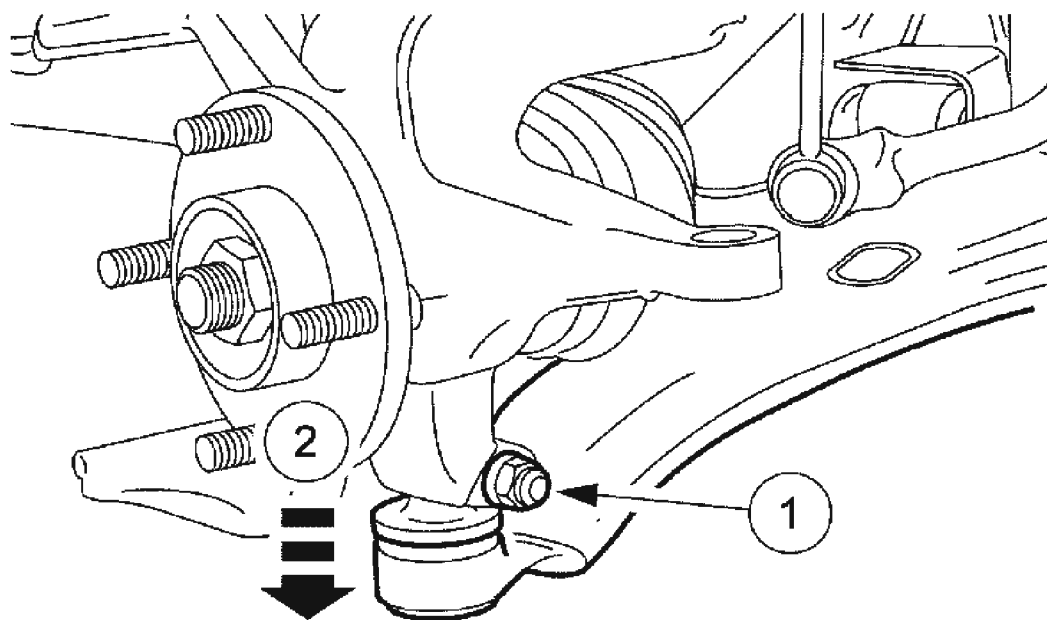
Detaching Tie-Rod End Ball Joint End Using Special Tool
